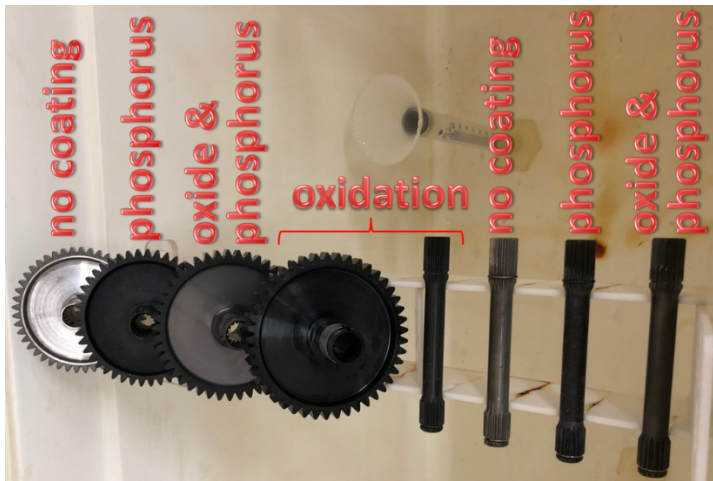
Gear wheels and torsion shafts before starting the NSS test
